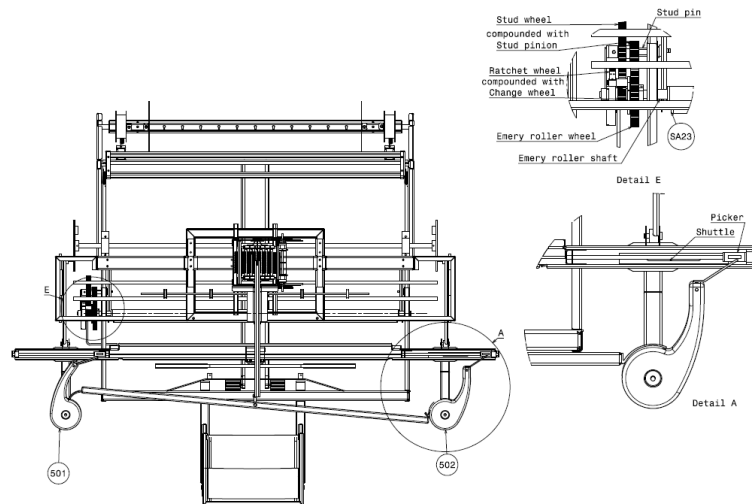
Top view of a semi-automatic handloom, detailed view of a 5-wheel gear mechanism (top view) for take-up, and Burmese type of under hung picking mechanism
